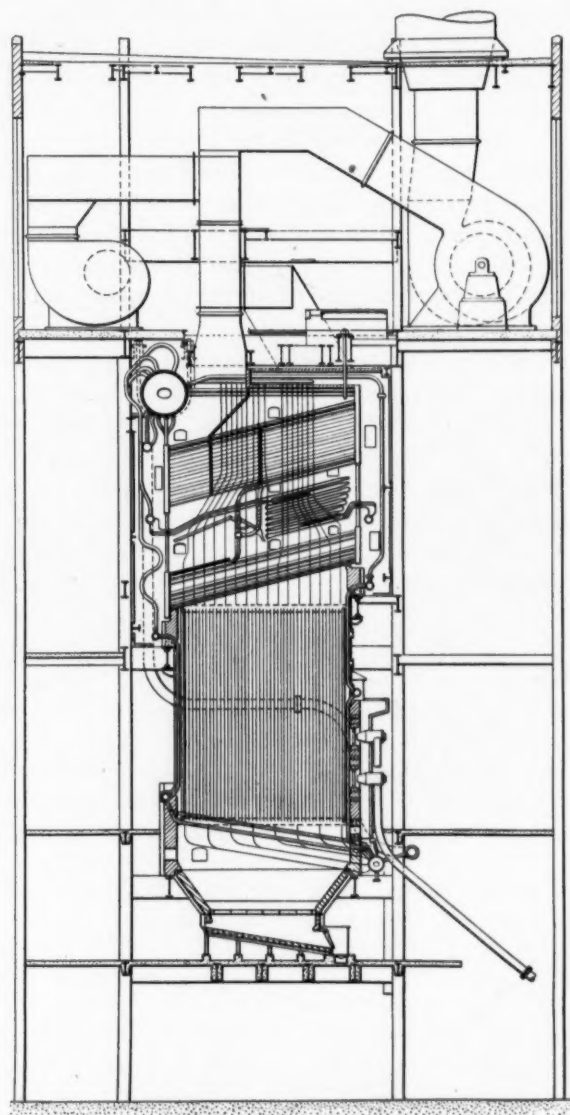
Section through boiler after rearrangement of tubes to rectify starvation
